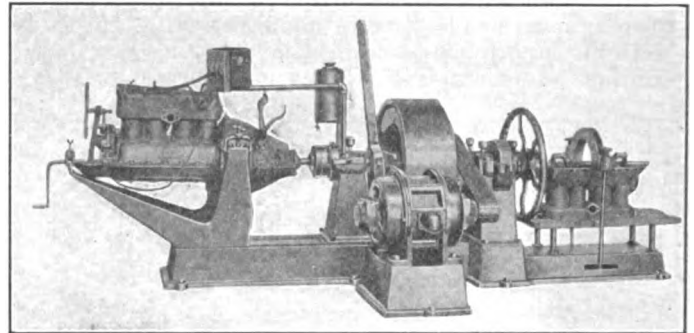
STAND FOR RUNNING-IN NEW ENGINE BEARINGS
